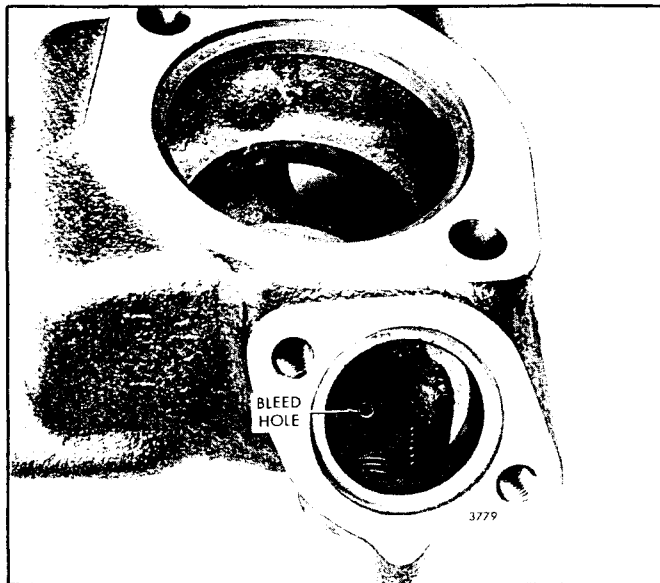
Bleed Hole in Thermostat Housing (V-Type Engine Housing Shown)
